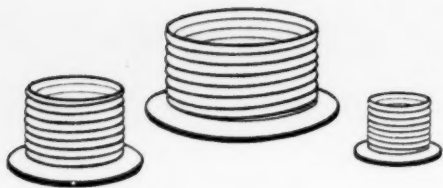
Forms for producing threaded holes in castings are made in standard pipe thread sizes, U. S. Standard thread, and for stove damper screw sizes.
